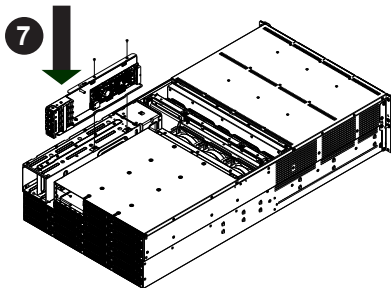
Installing the JBOD Compartment Bracket Assembly
